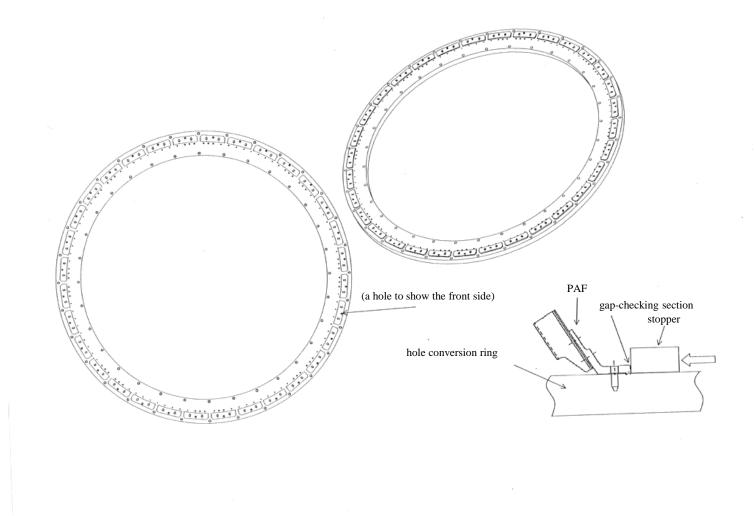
Assembly Drawing of Stopper on Screw Hole Conversion Ring for Horizontal Vibration Table
